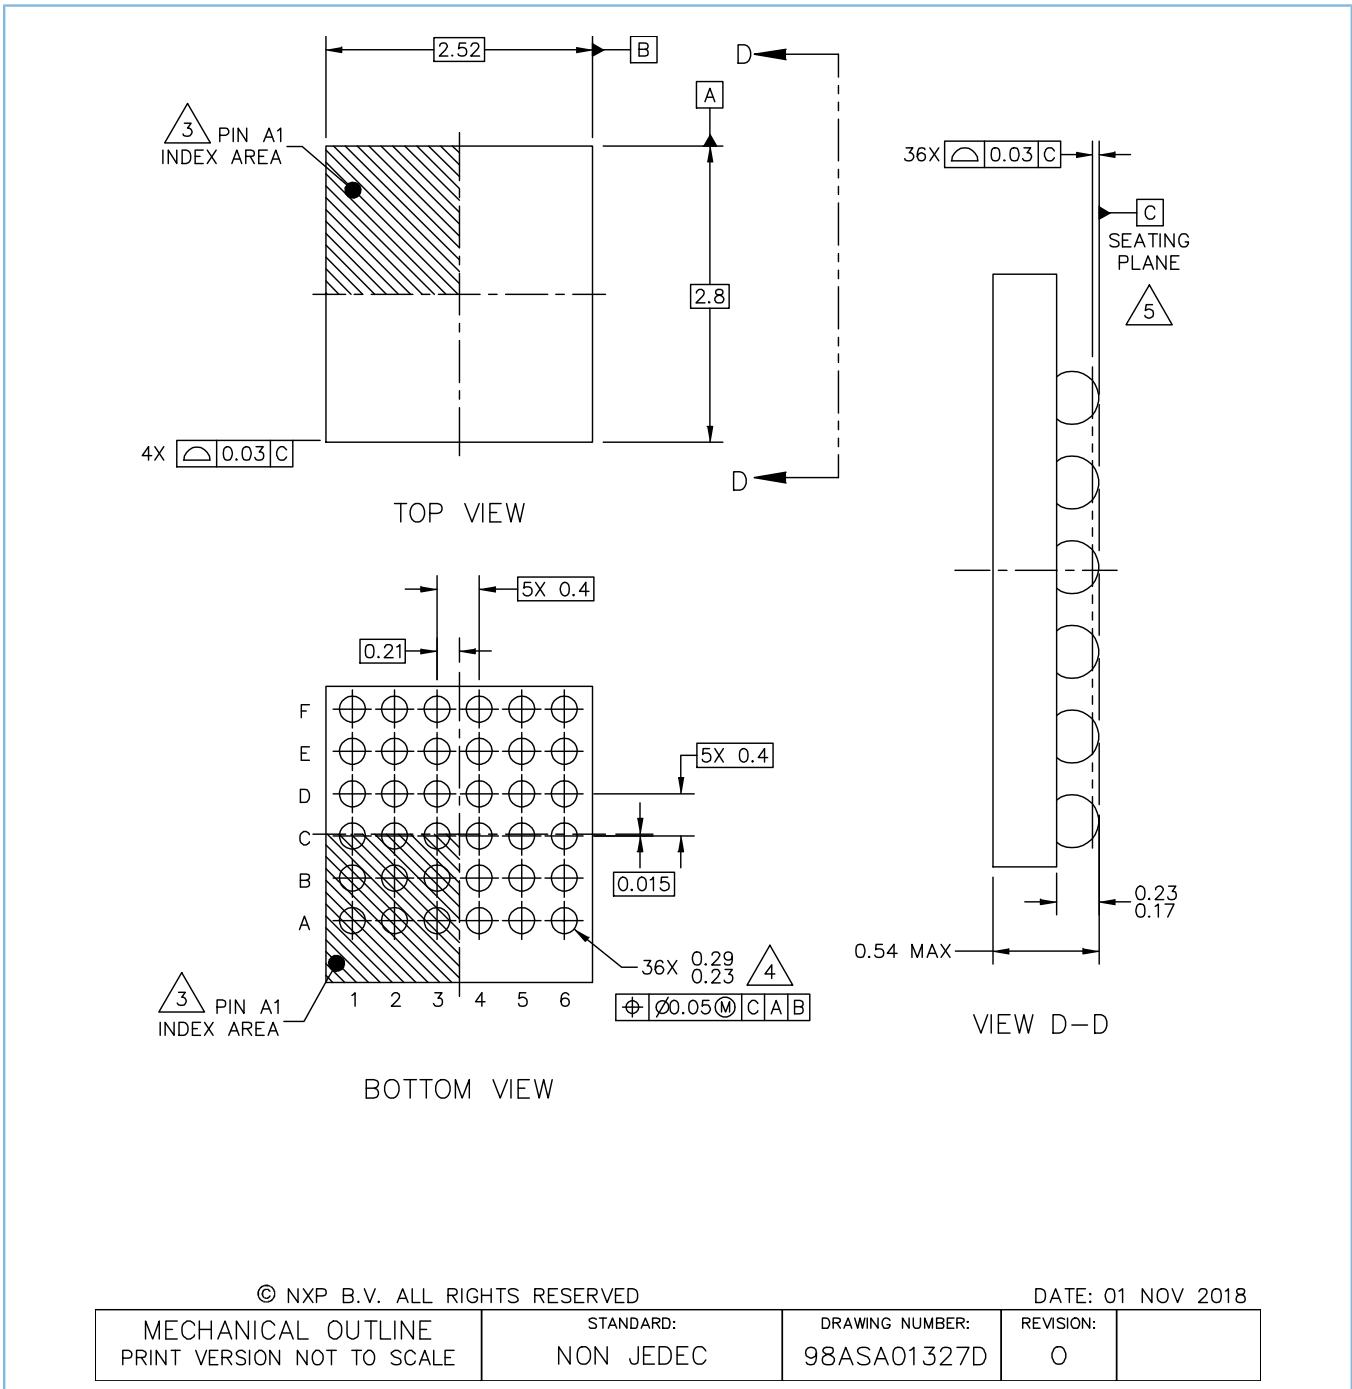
Package outline WLCSP36 (SOT1780-10); no back side coating
